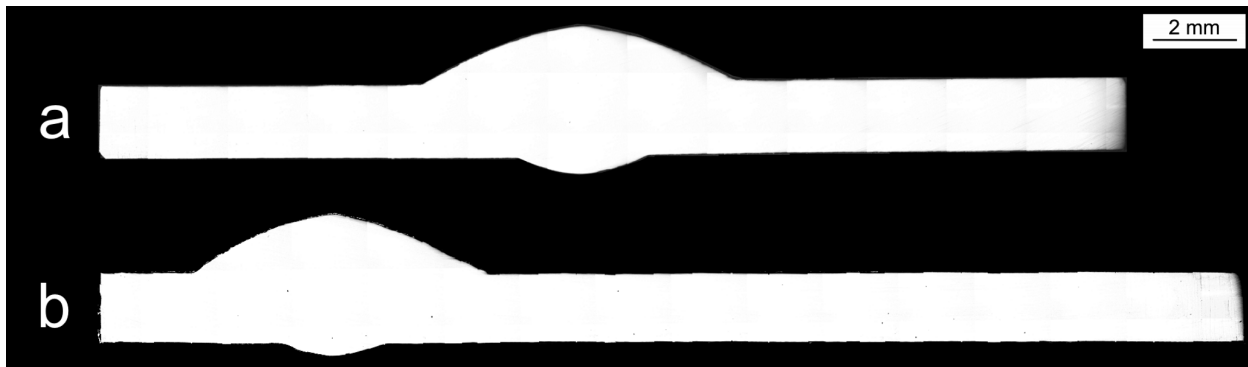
Cross-sections used for the study of welded samples: a) symmetrical and b) asymmetrical. The inflated regions on these specimens represent the weld fusion zone with reinforcement material and root penetration still intact.
